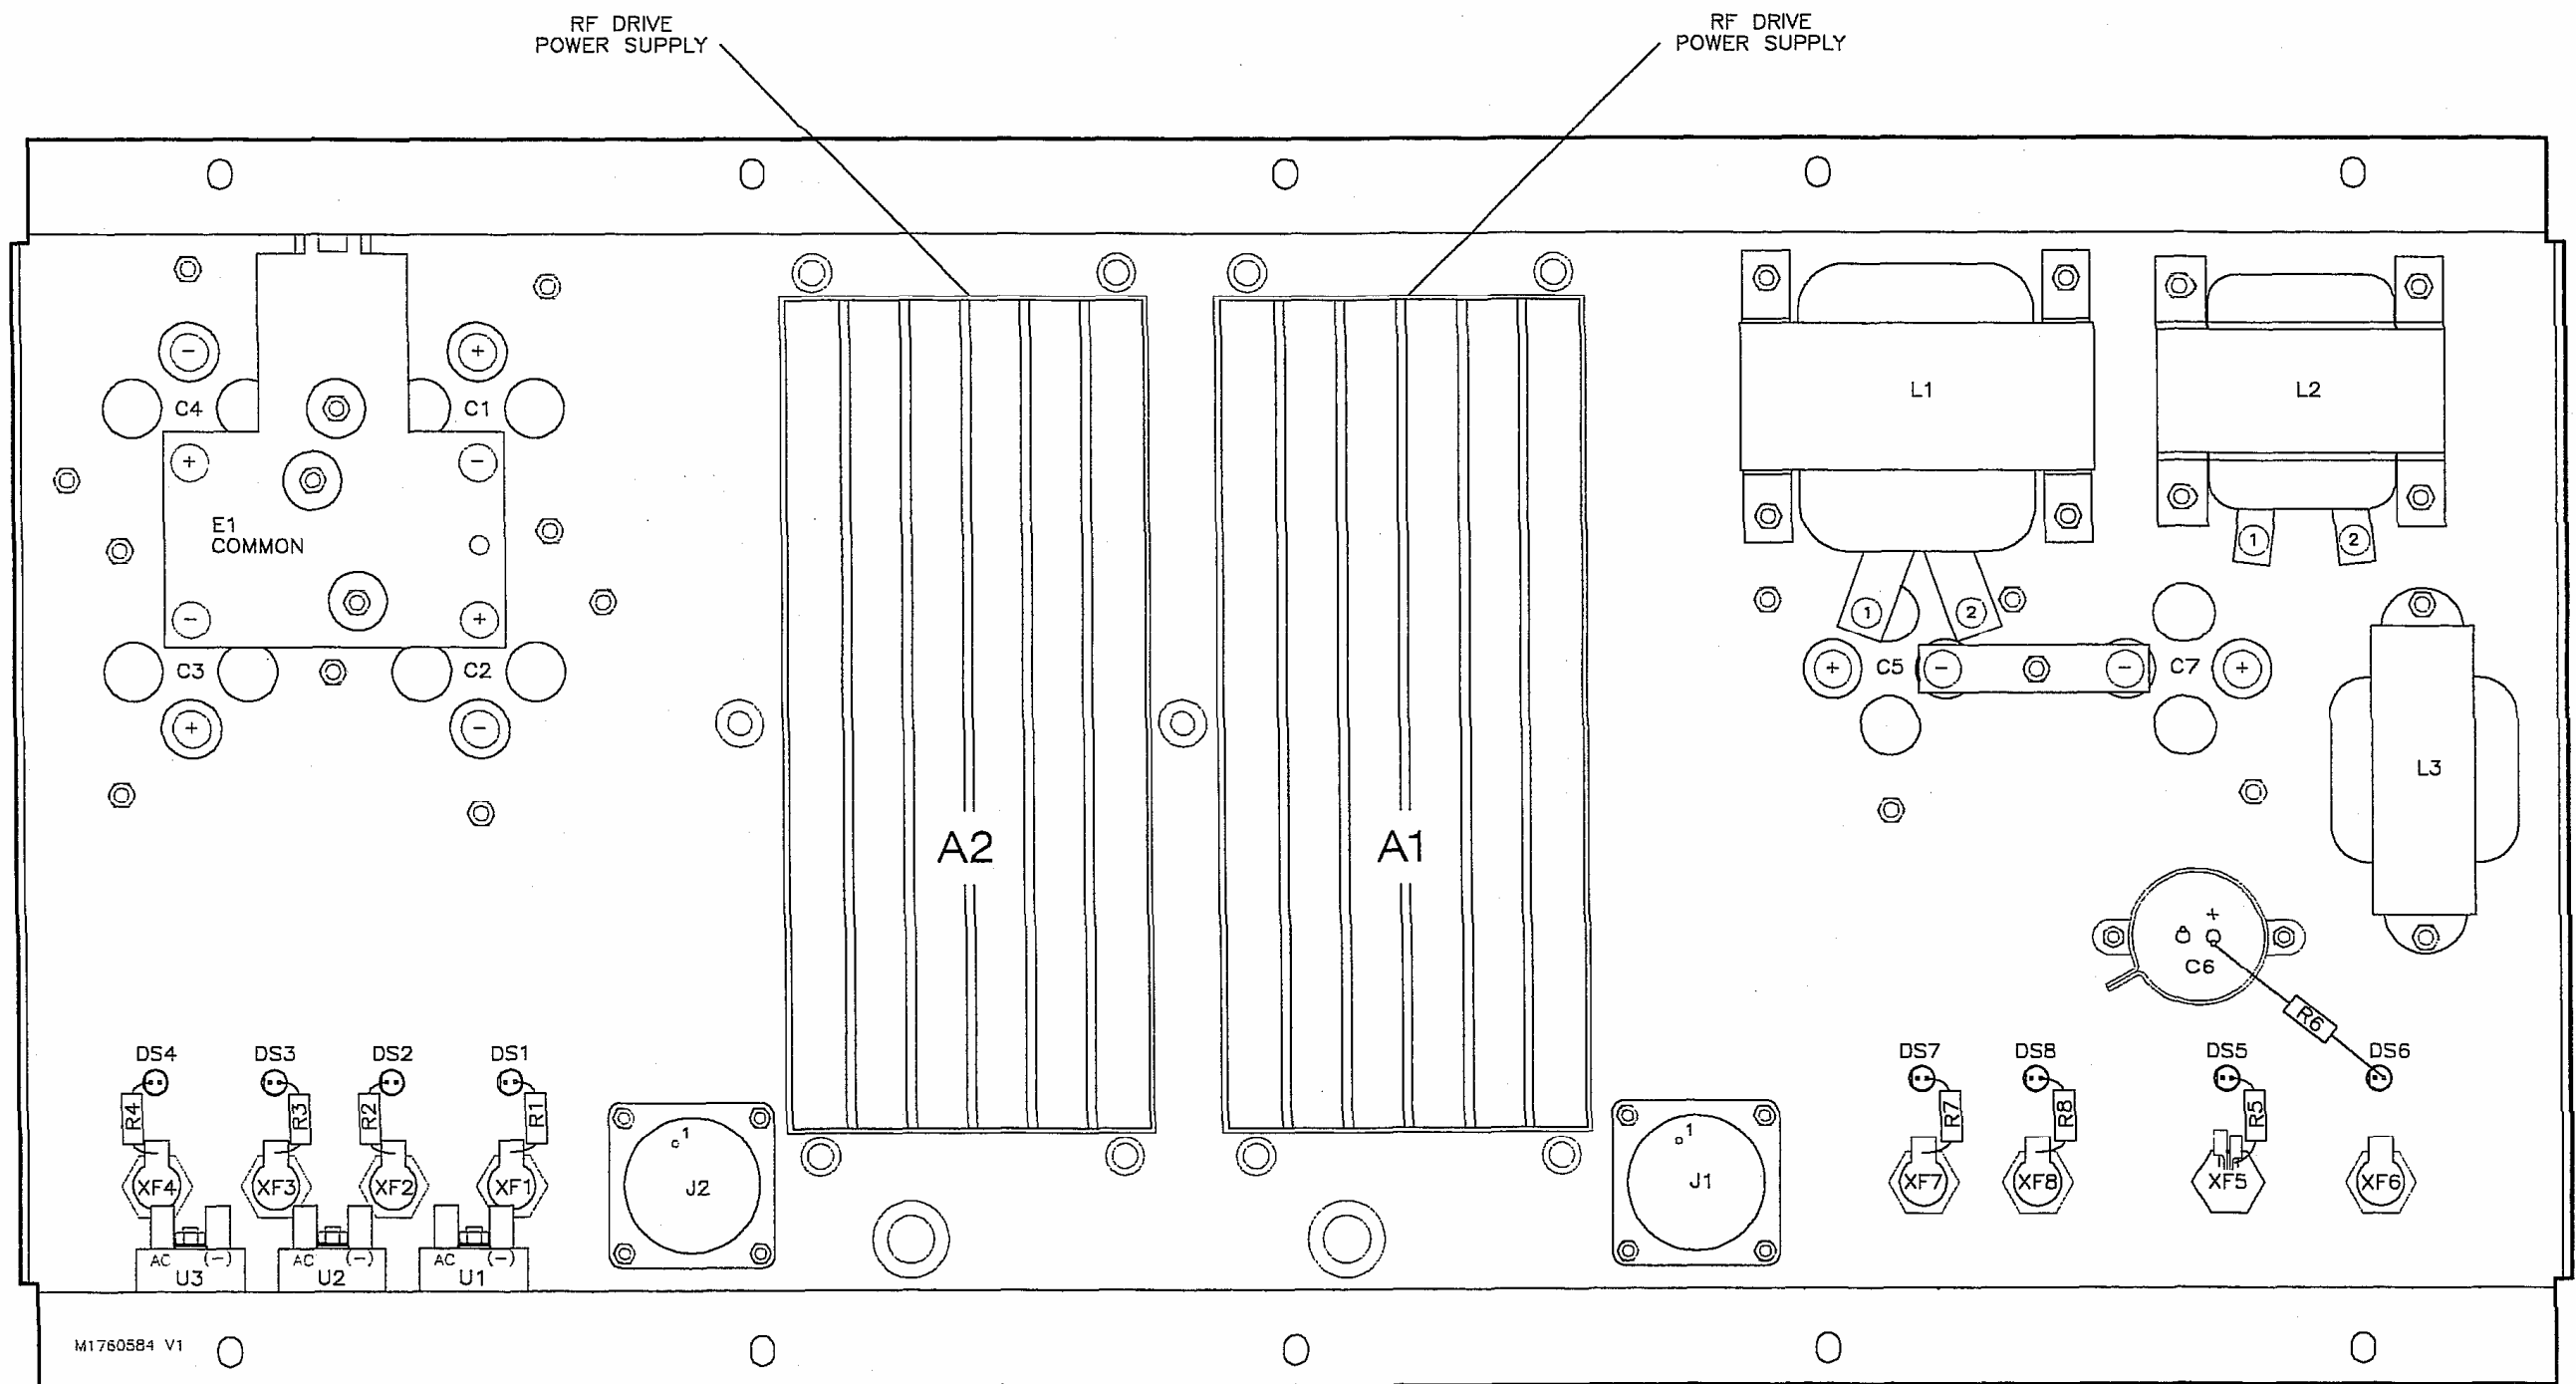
Assembly Detail - NASR106 DC Power Supply (Bottom)
